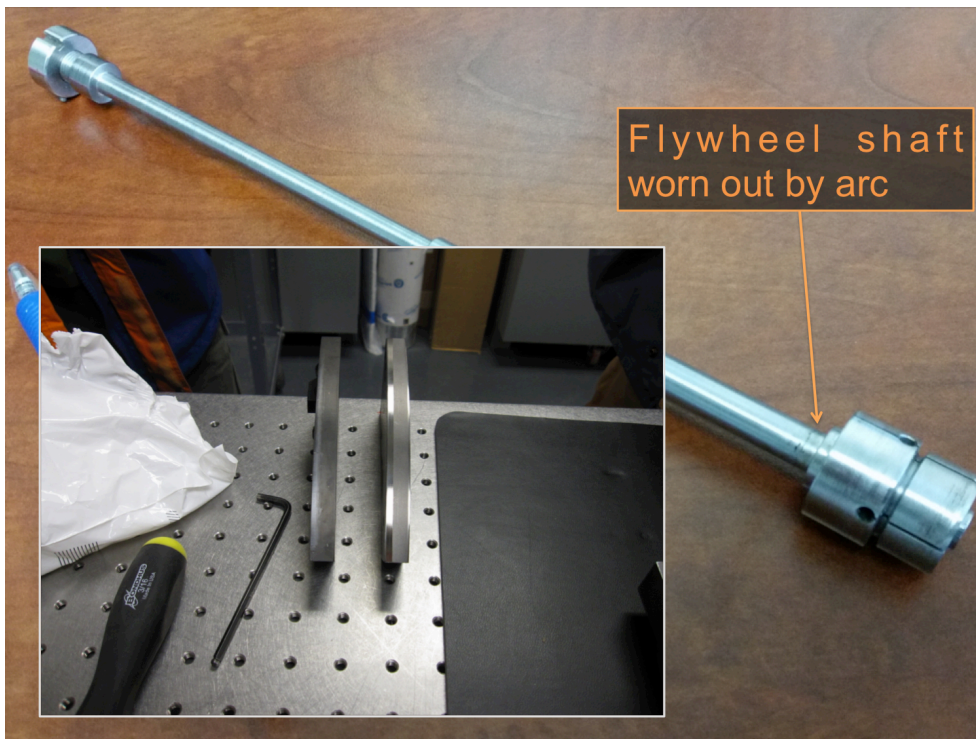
Flywheel shaft worn out by contact with arc. Inset shows the old arc (left) and the replacement arc (right), which has been machined with a beveled surface to prevent wearing the flywheel shaft.
